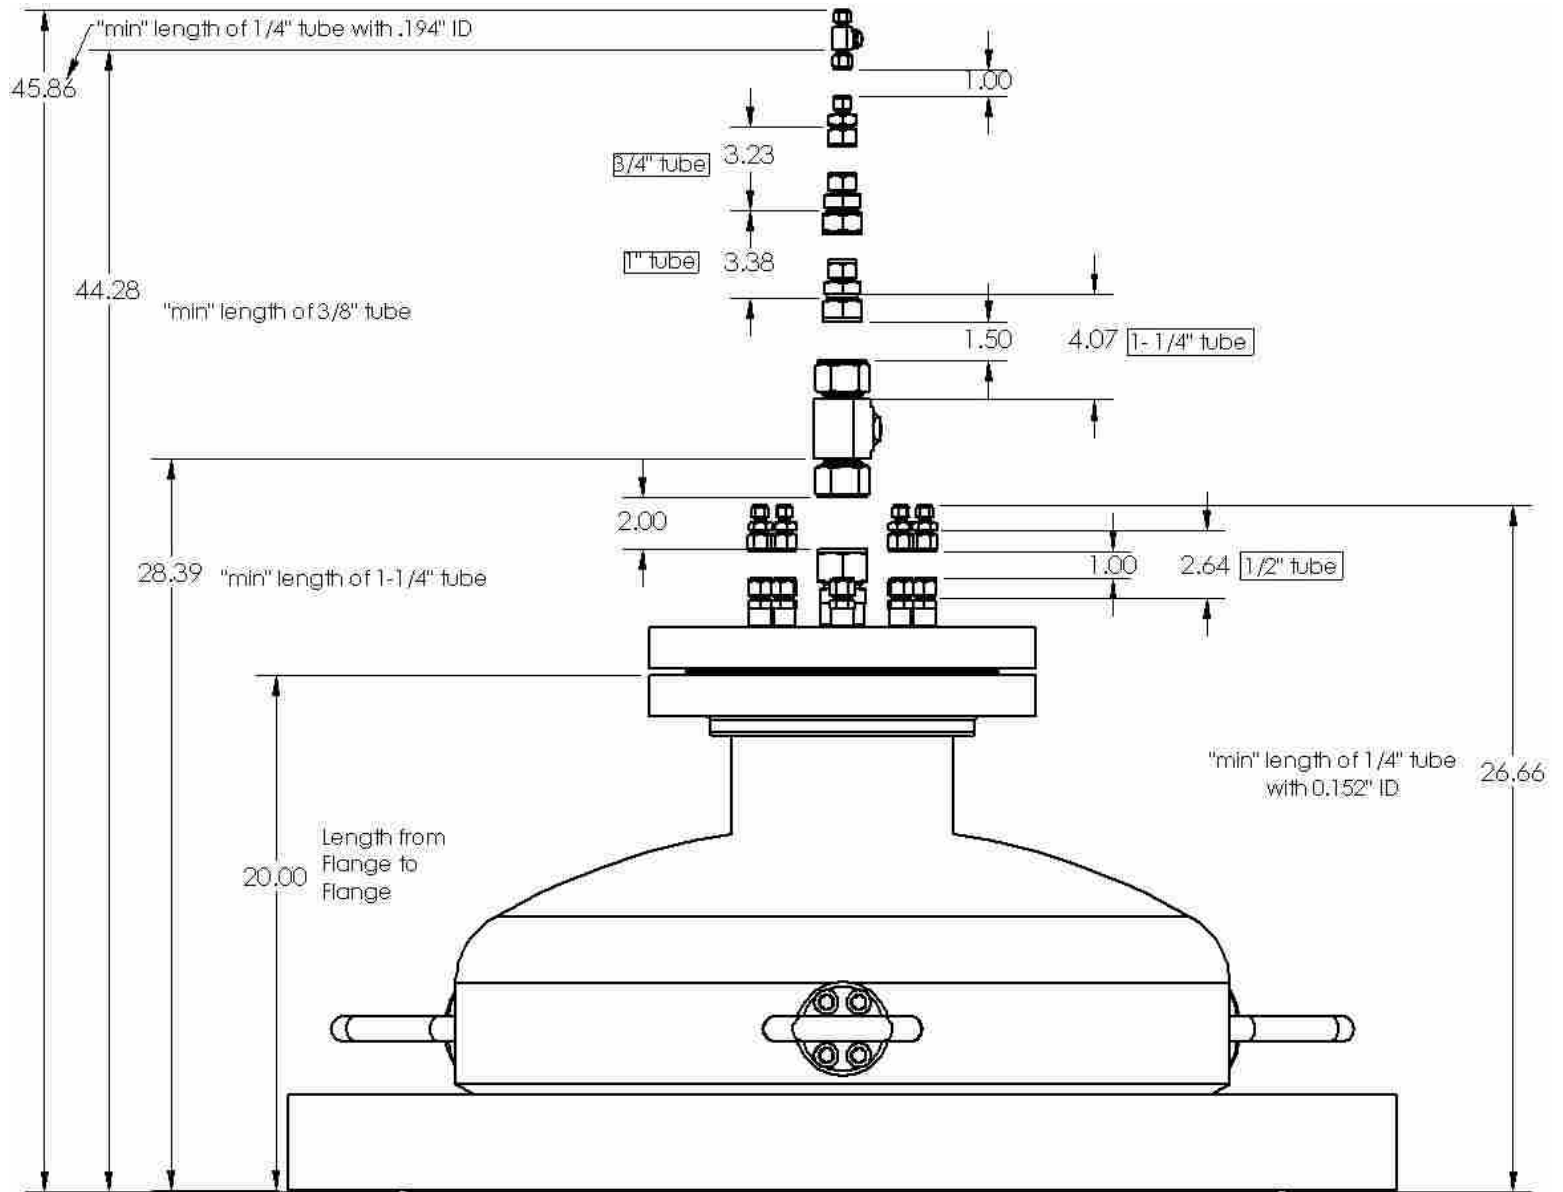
Drawing of Side View of Cap Burner with Swagelok Fittings
